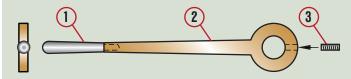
Throttle assembly, full size. 1 -Throttle handle; 2 -Throttle arm; 3 -0-80 by 0.188-inch cup point set screw.
